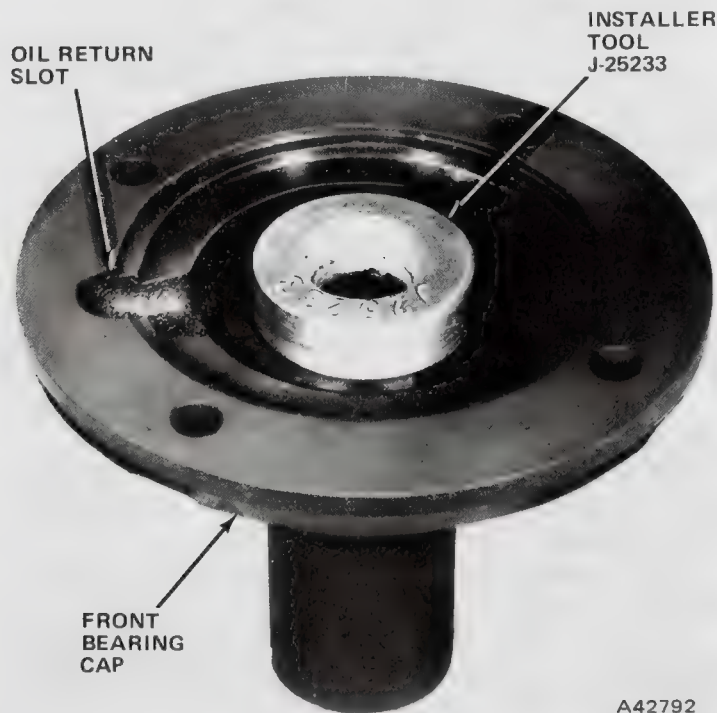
B-17 Front Bearing Cap Oil Seal Installation
